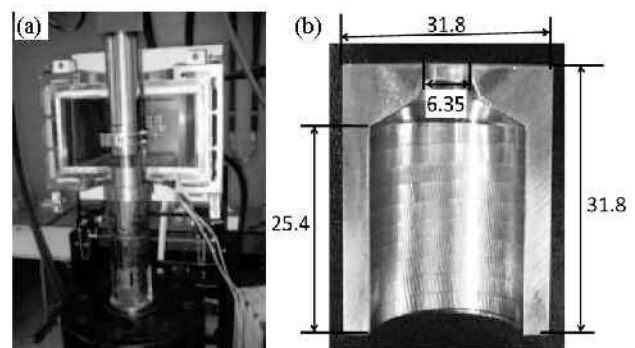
Lab-scale extrusion fixture inside the furnace chamber on the INSTRON 8850 machine (a), and a magnified picture of the flat die section (b).
